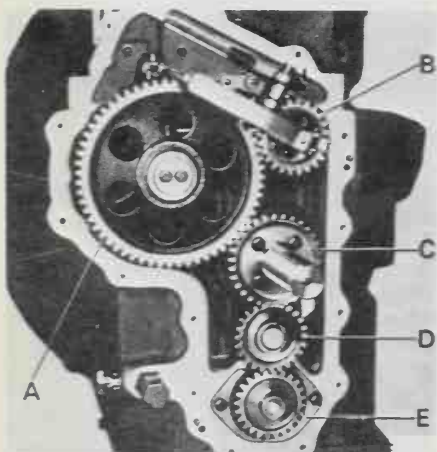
Basic gear train used on HR engines. Initial backlash between gears is 0.001-0.009 inch with maximum backlash of 0.012 inch.
